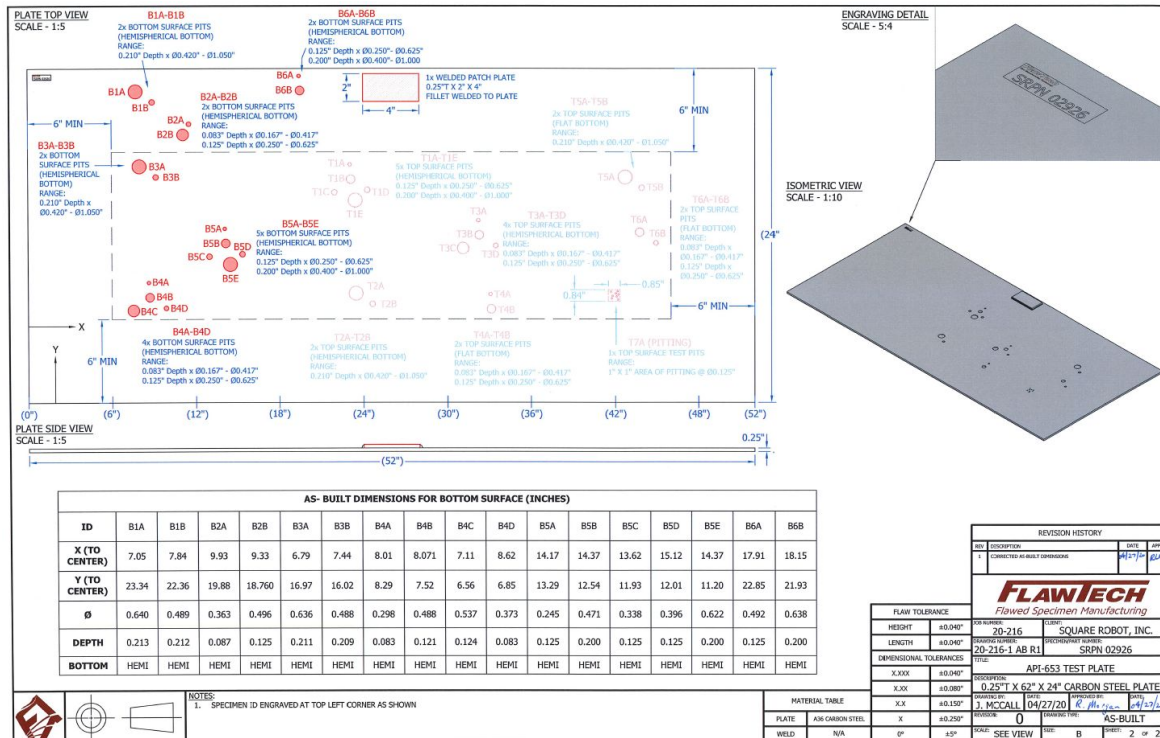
20-216-1 AB R1, API 653 Plate SRPN 02926 Inspected Defect Sizing, Soil Side
